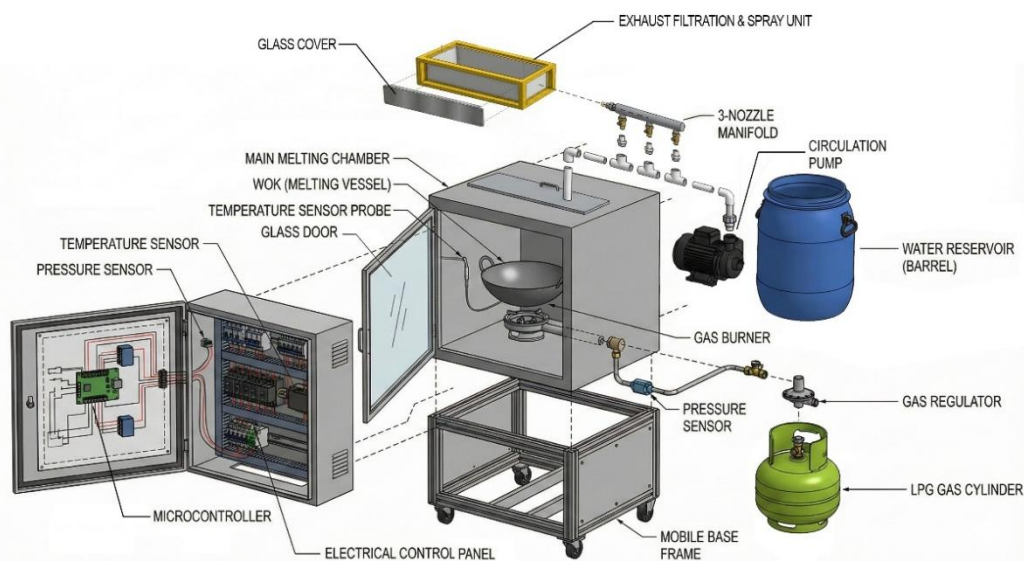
Exploded View of IoT Based Mobile Plastic Melting Machine
